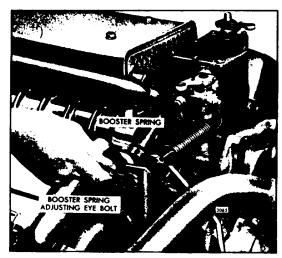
Adjusting Booster Spring differential lever as lightly as possible and still eliminates engine roll.
